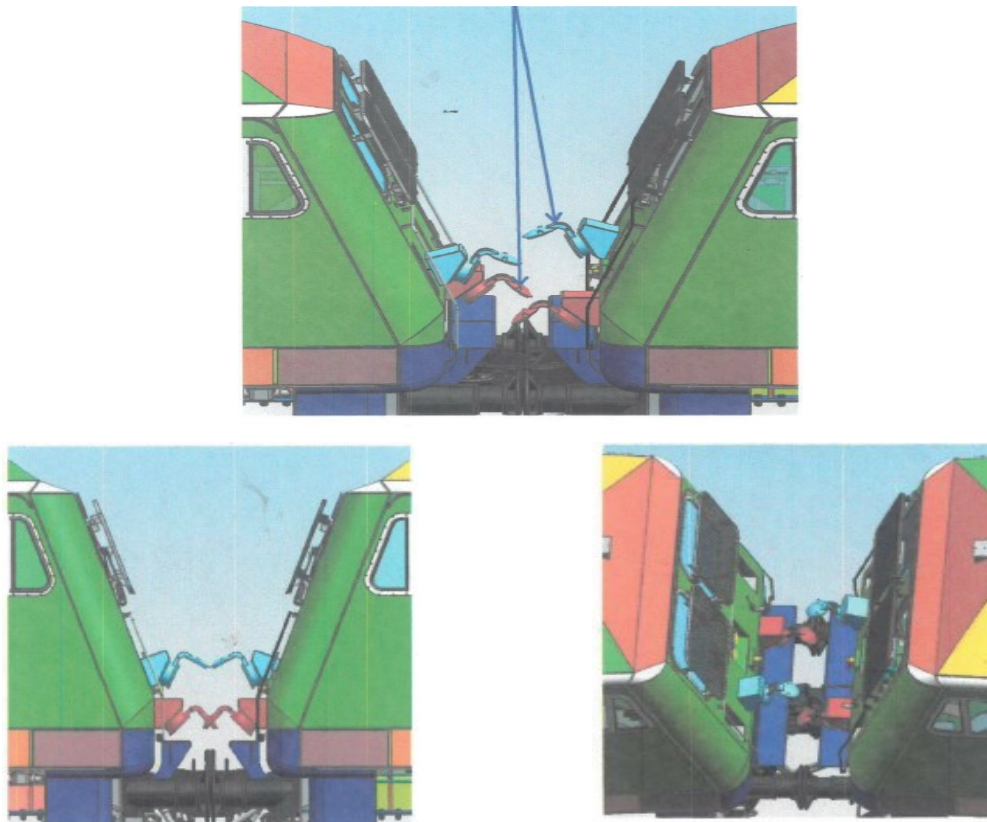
Infringement of Plug Assembly with LP side IVC Housing Hinged Cover
